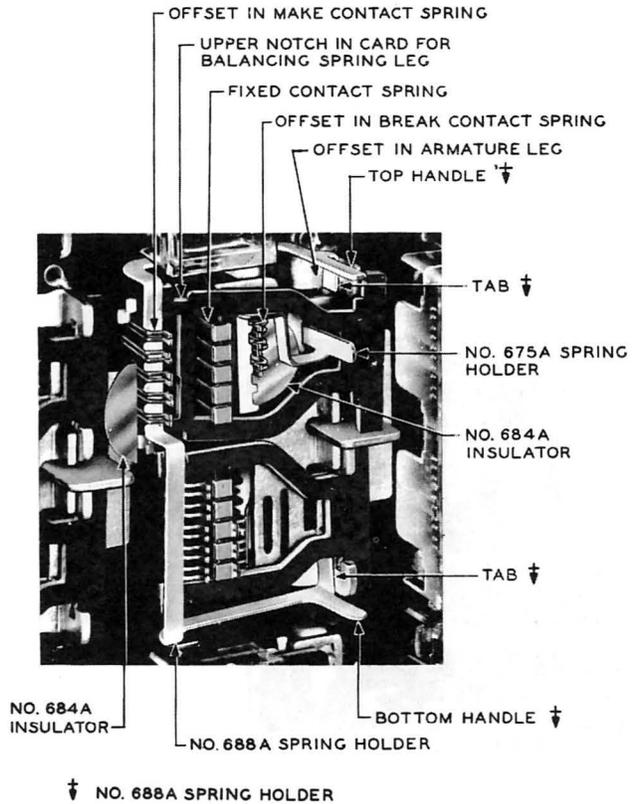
No. 688A Spring Holder Mounted on Relay (No. 675A Spring Holder and No. 684A Insulators in Place on Upper Half of Relay)
